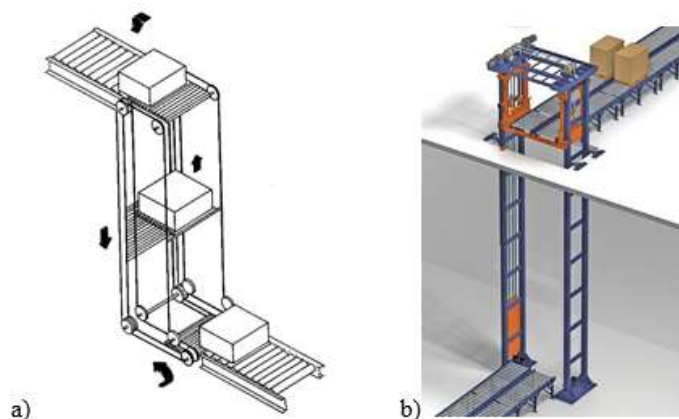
Equipment used in high-rise industrial enterprises for transporting goods between floors: a) elevator for high-rise buildings; b) elevator for low-rise buildings.
